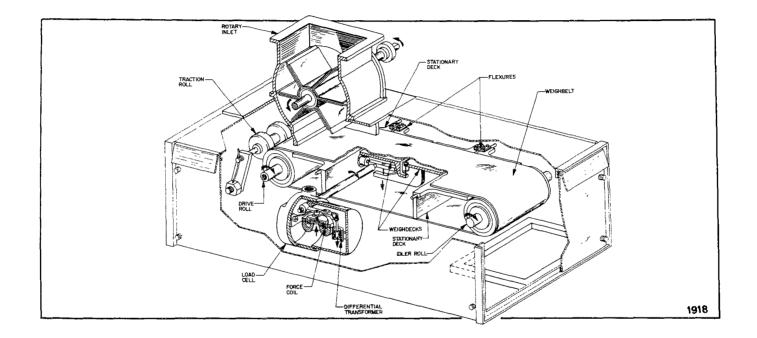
Typical belt type gravimetric feeder (courtesy of Wallace & Tiernan, division of Pennwalt Corporation)
